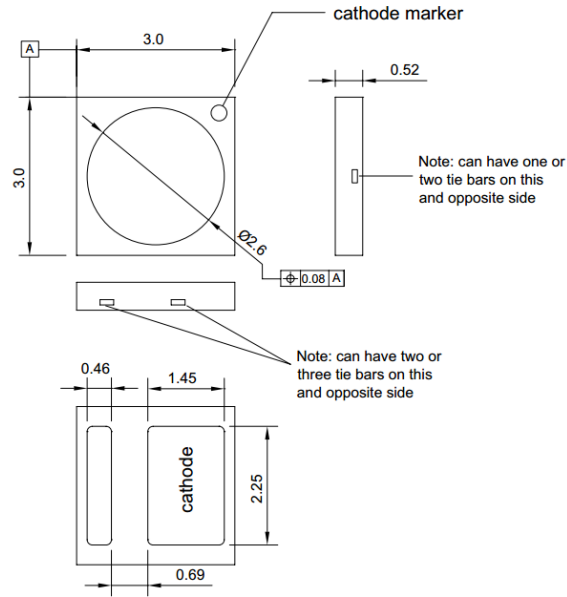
Mechanical Drawing for LUXEON 3030 2D Round LES. All dimensions are in millimeters.
